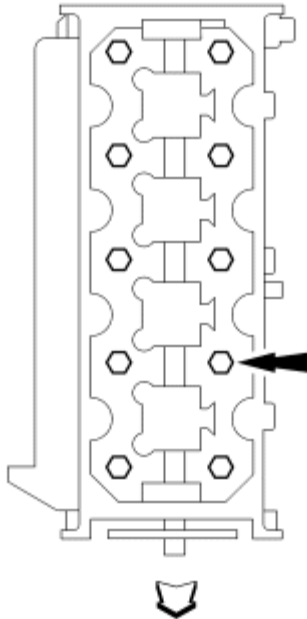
Identifying Cylinder Head Gasket And Bolts
